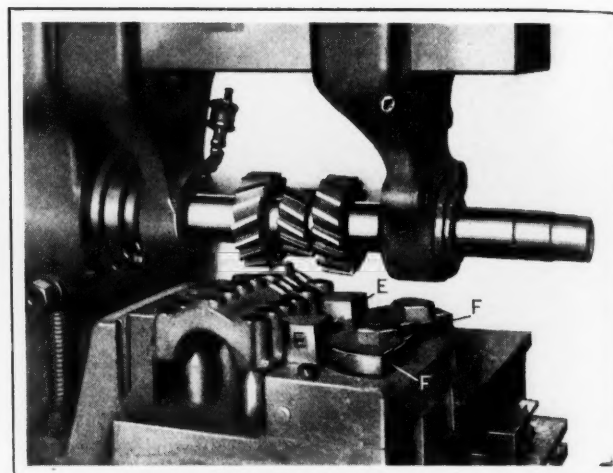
Milling the Bolt-hole and Oil-plug Pads of Castings C and D, Fig. 1
